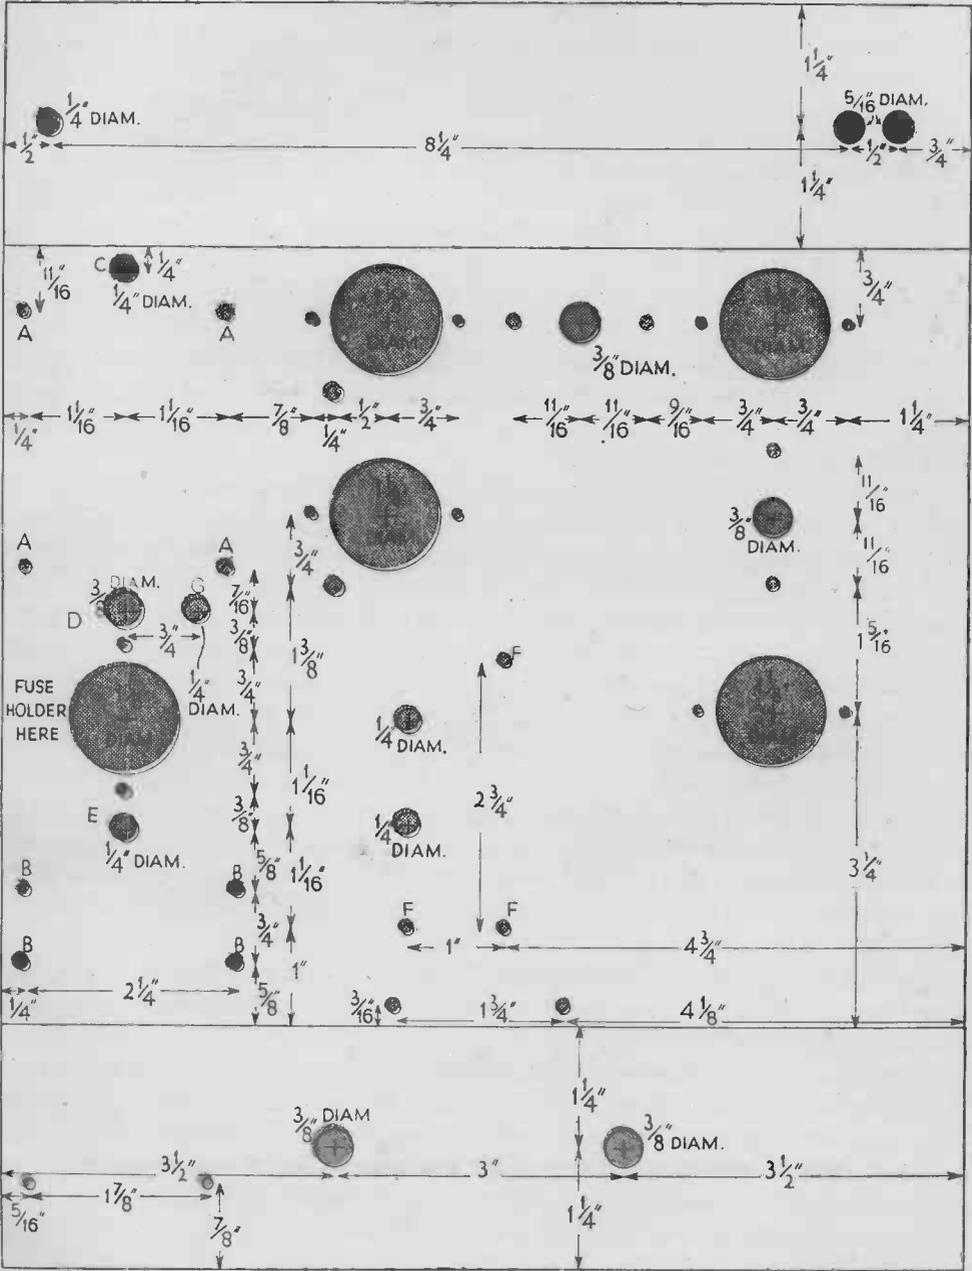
THE A.C. MAINS SUPERHET, CHASSIS TOP VIEW
